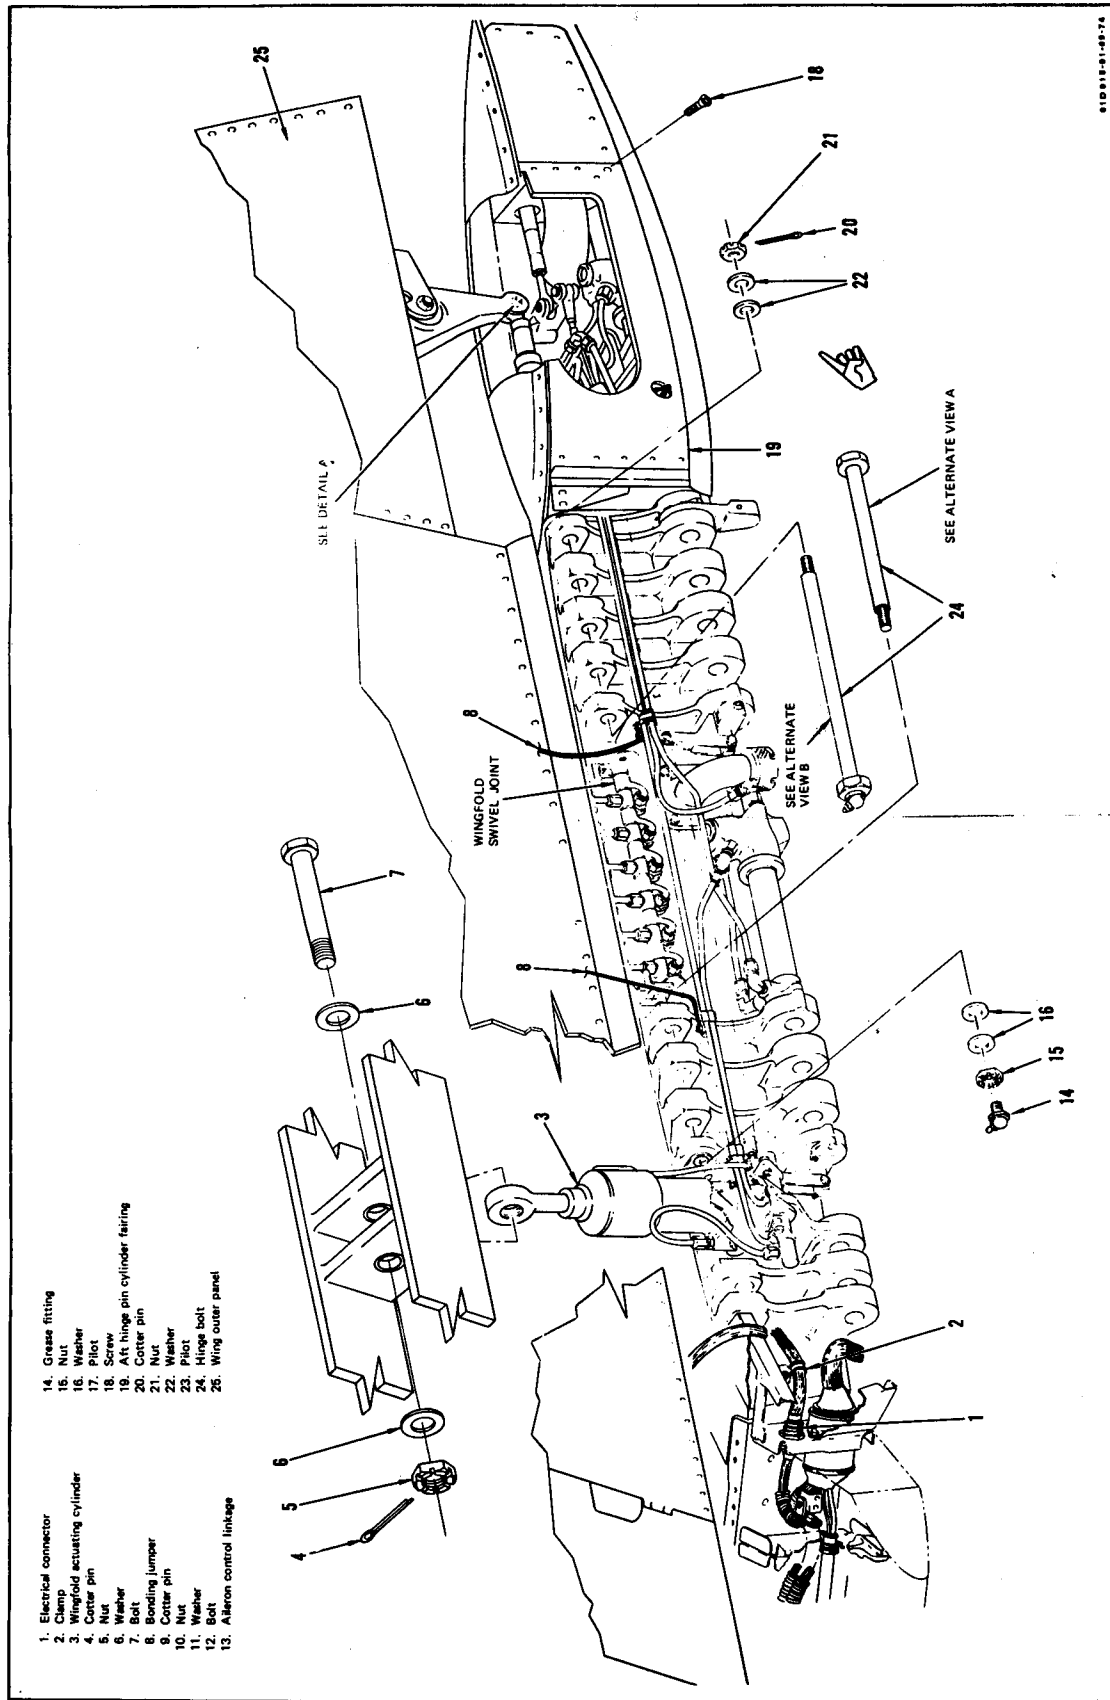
Wing Outer Panel Removal and Installation (Sheet 1)
